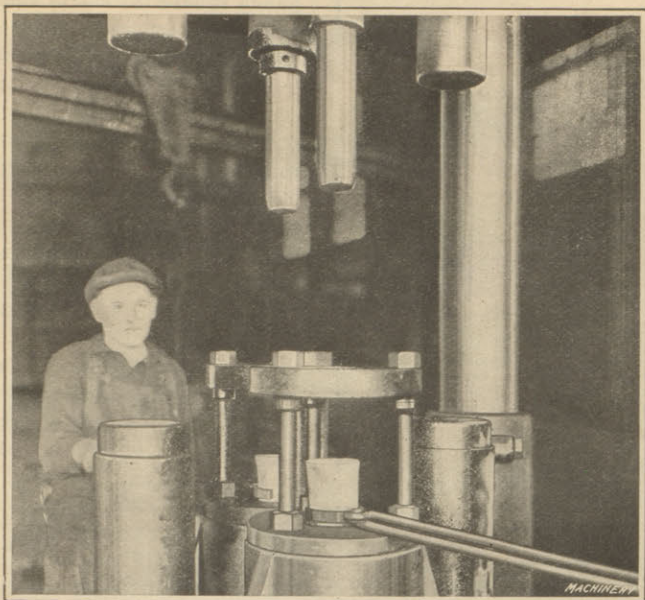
Piercing Billets for Shrapnel Forgings in a "Wood" 750-ton Hydraulic Forging Press
